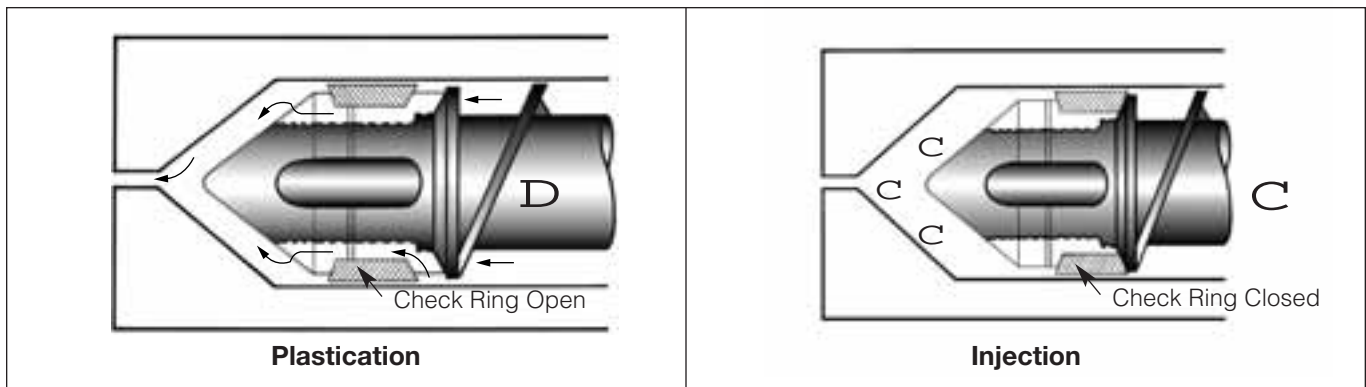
Check Ring Nonreturn Valve Used on Reciprocating Screw Injection Molding Machines
